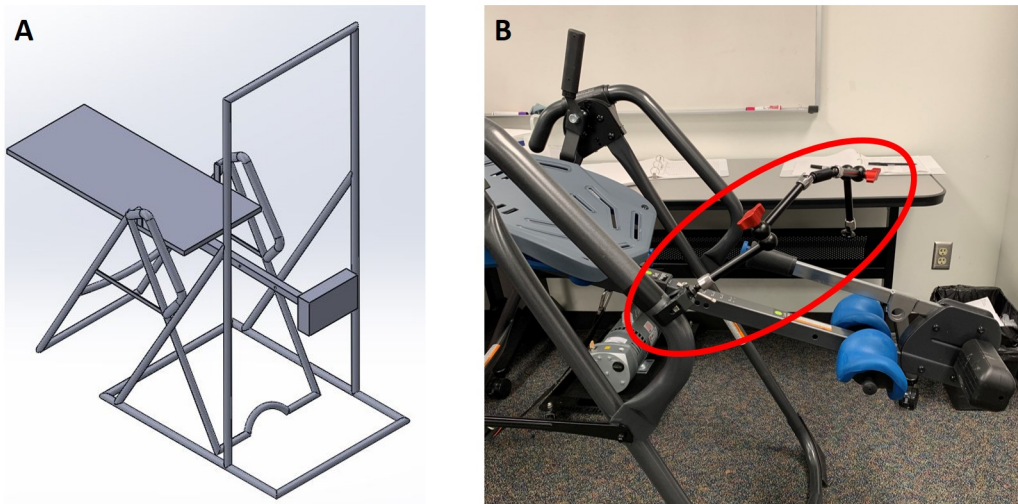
Considered instrument mount designs: A) External structure, and B) Camera arms
